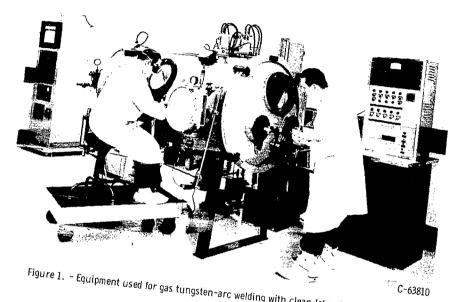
Equipment used for gas tungsten-arc welding with clean laboratory conditions.
